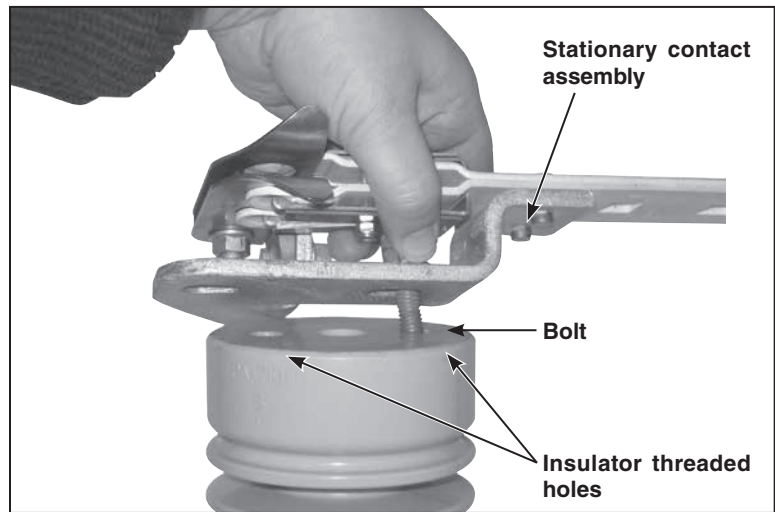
Align the outer bolt and hand-tighten until there is enough clearance to slide the mounting bracket.
